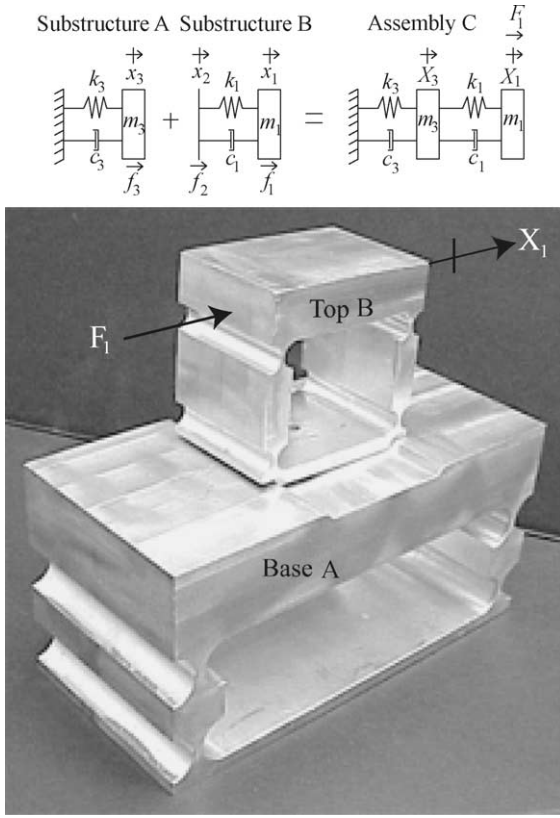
Lumped parameter stacked flexure model and photograph of 2DOF flexure assembly.
